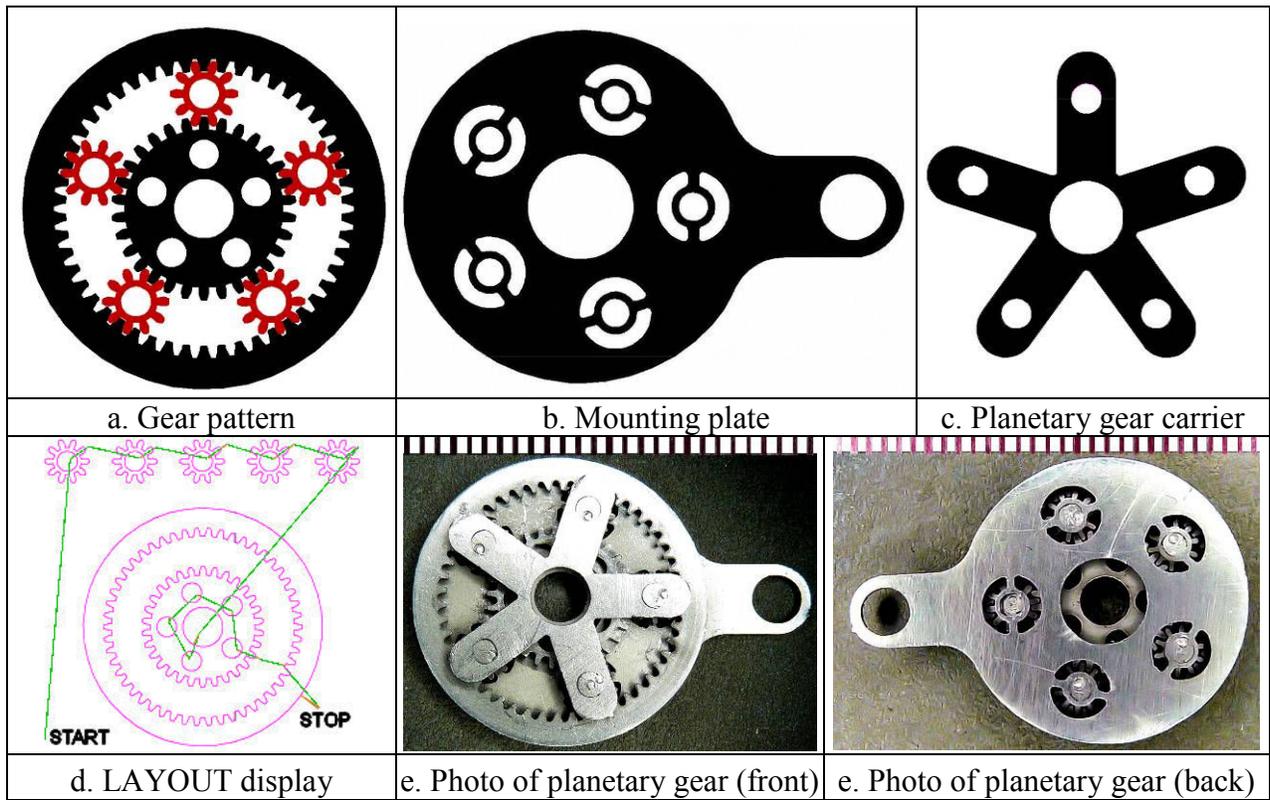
AWJ-machined stainless steel planetary gear set – scale in mm
